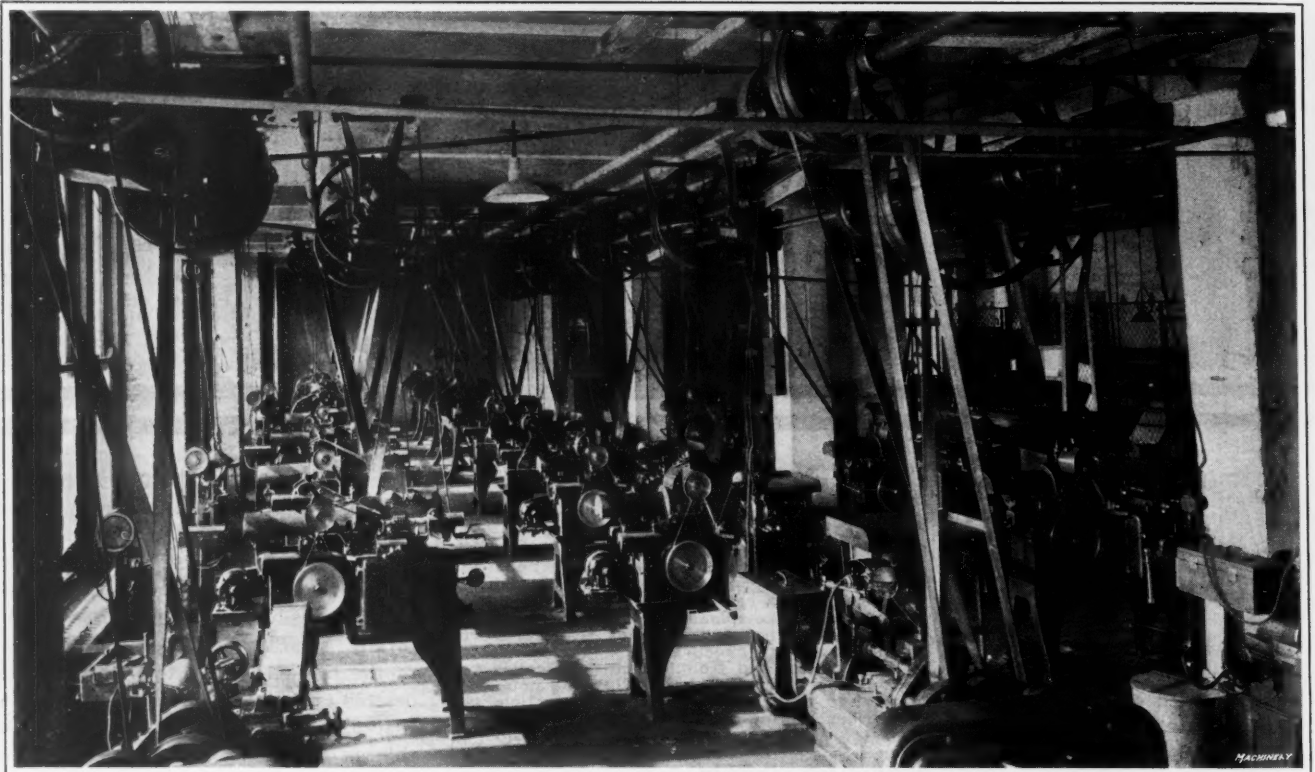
View of Part of Hob-grinding Department of Illinois Tool Works
